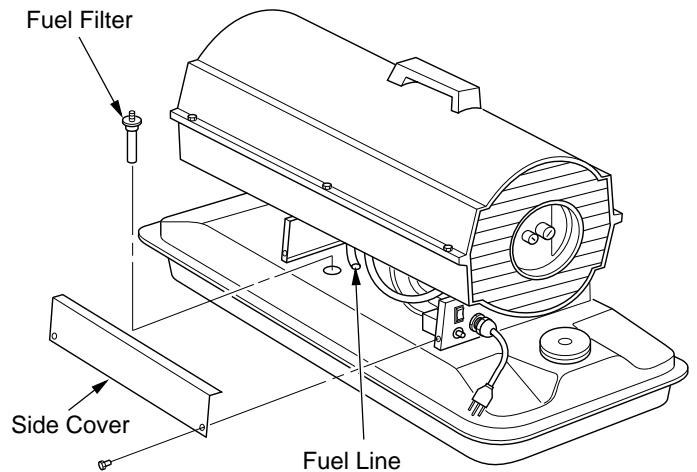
Fuel Filter Removal, 35/70,000 Btu/Hr Models
